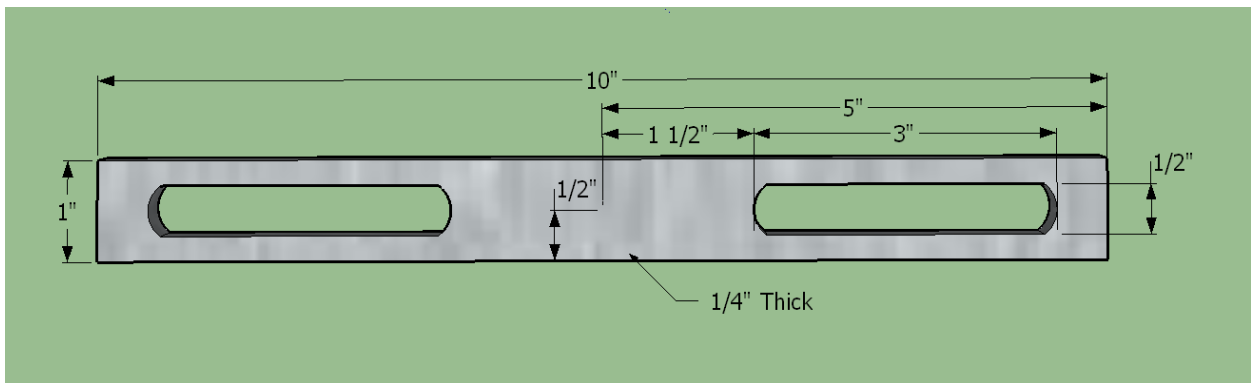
Brackets (B1 & B2)- Sample Holder of Rectangular Specimens.
